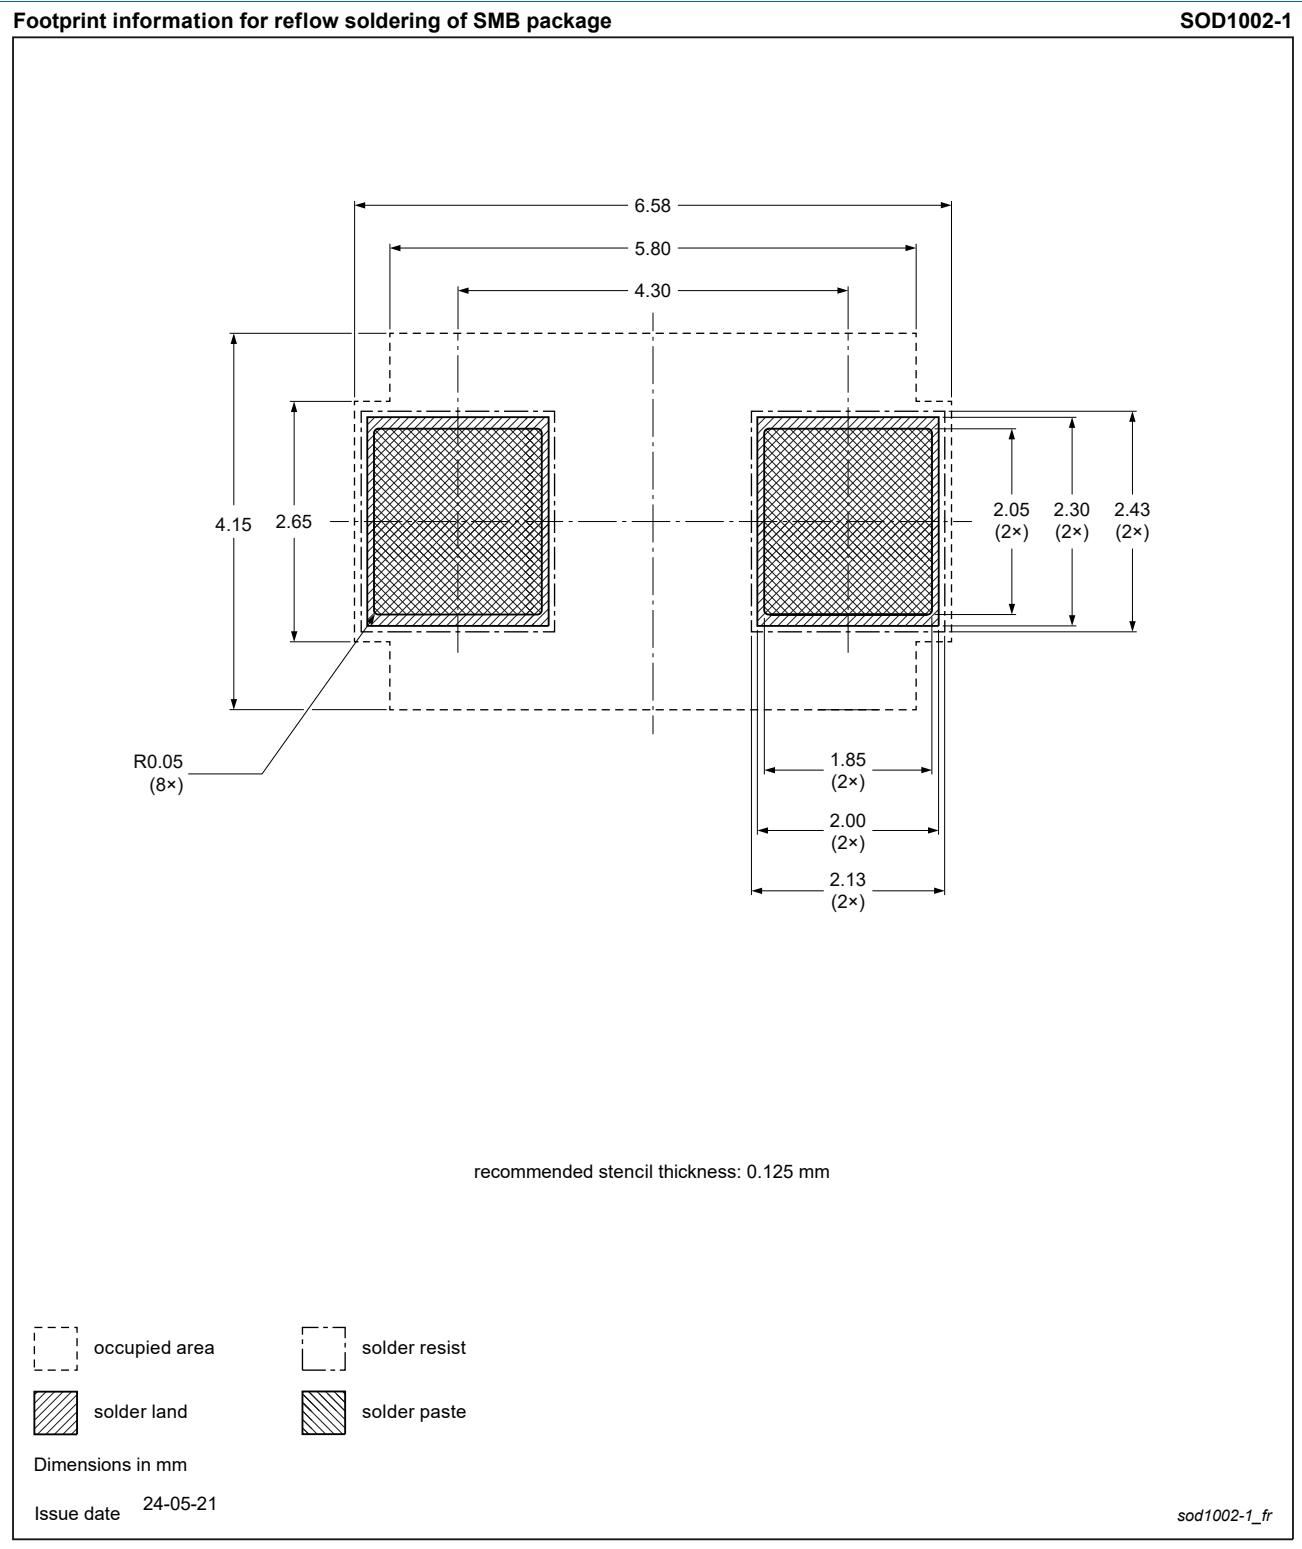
Reflow soldering footprint for SMB (SOD1002-1)
